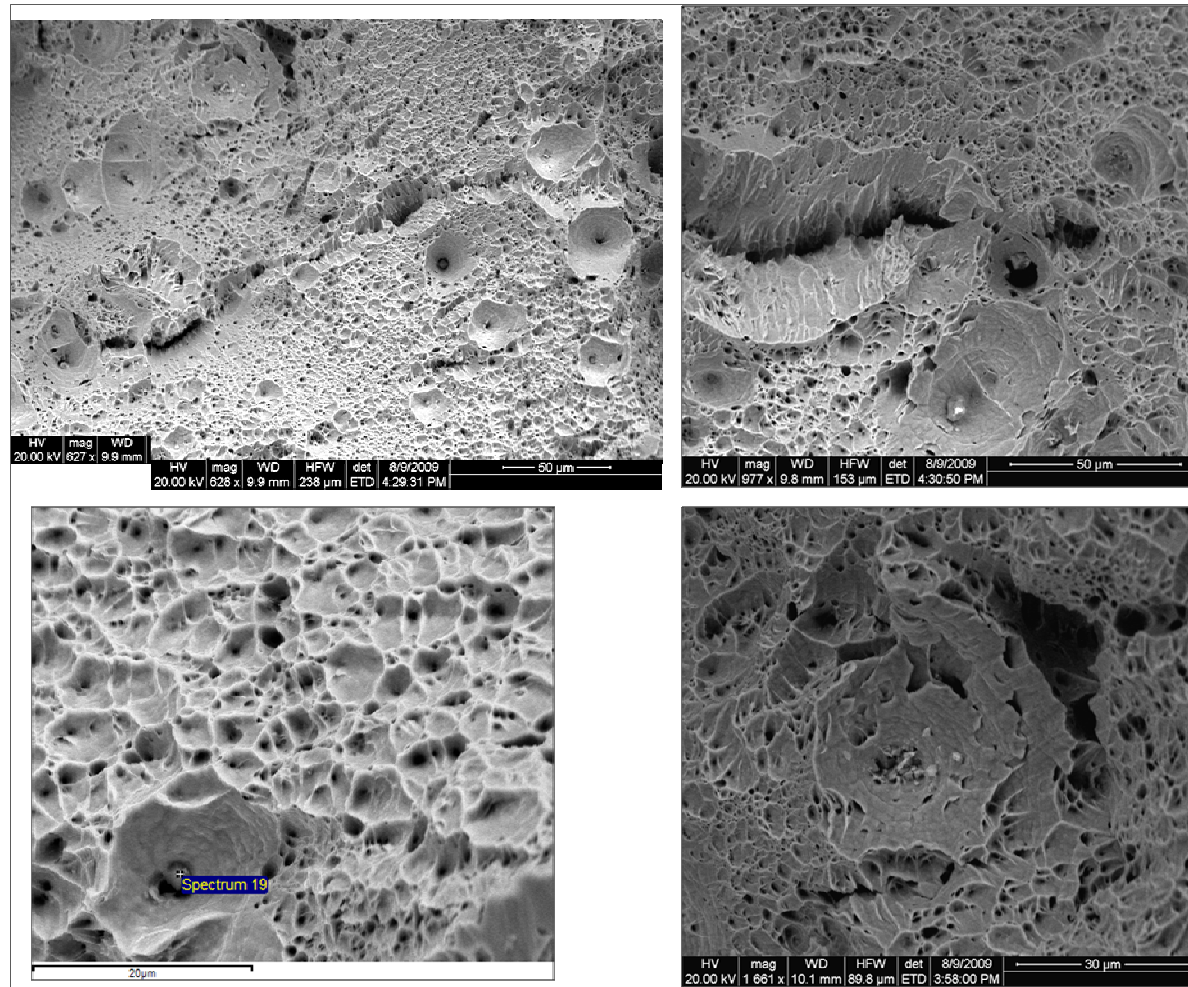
Fracture surfaces taken from the center of the broken shallow notched bar sample 1T2-R.
